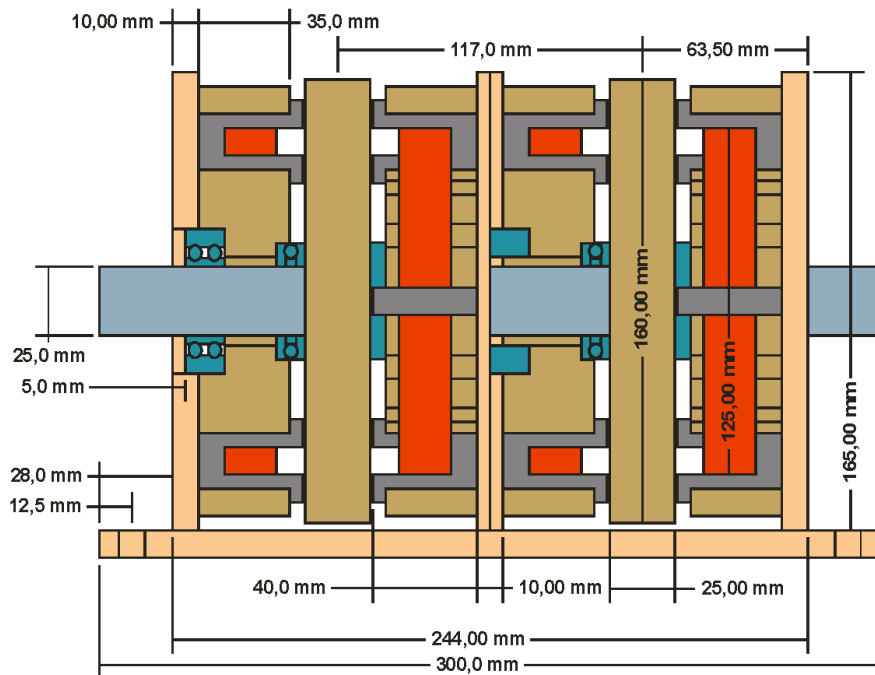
Investigated design of the Transversal Flux Machine: Axial arrangement, 2 phases, double stator (not all iron cores shown), and rotor with “buried” magnets. The stators on the left sides are shown in cross sectional view.
